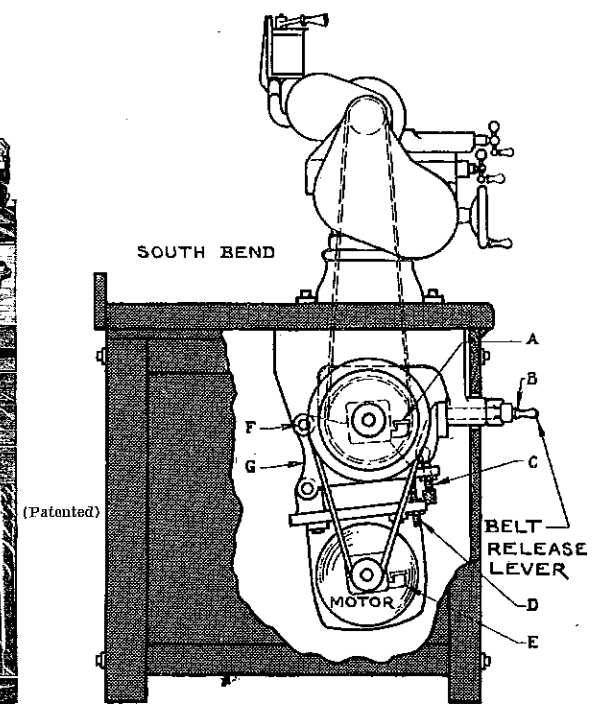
Cross Section End View of Underneath Belt Motor Driven Bench Lathe.
